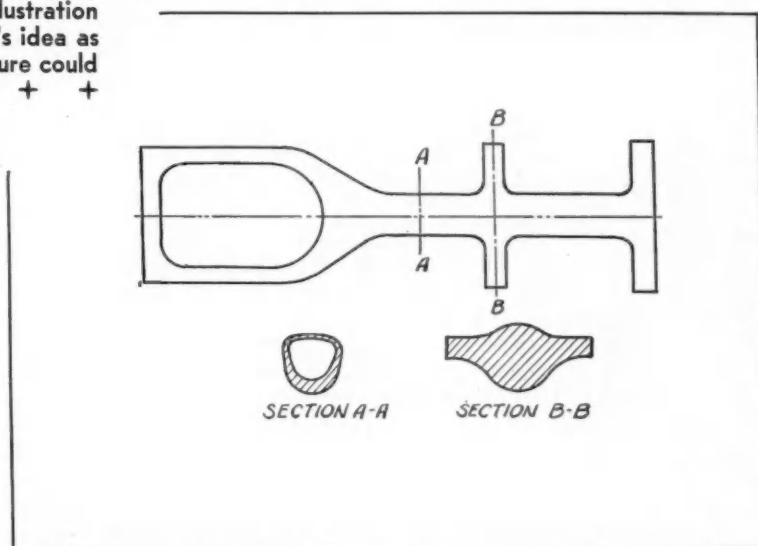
Thinner stock might be used and stamped out of sheet stock using only two stampings welded together in a complete box at the horizontal center line of the material + + + + +
